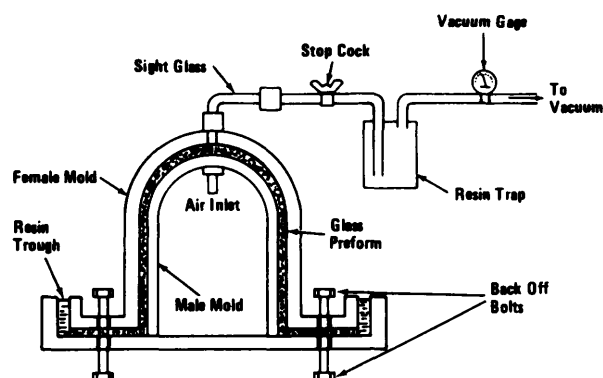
Vacuum Injection Molding (Ref. 1)
